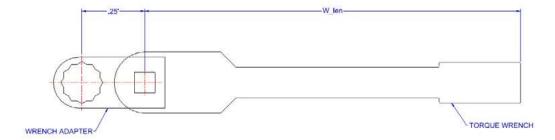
Wrench Adapter and Wrench Torque Arm Dimensions
